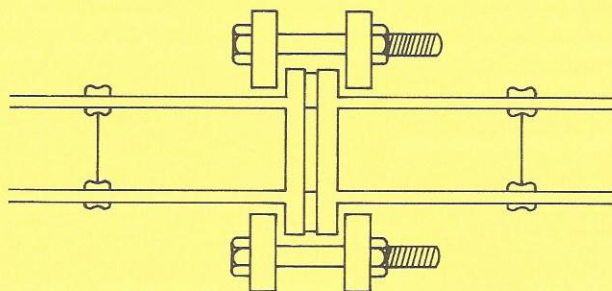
Section through typical test piece for the testing of flange assemblies (for clarification only)
